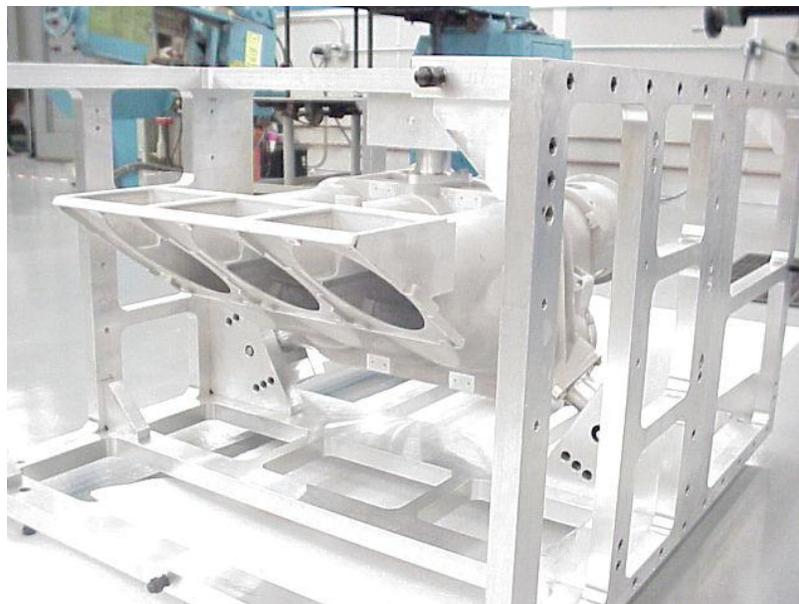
The flight spare optical bench housing mounted in the bench assembly/alignment fixture during a check fit at the Hamilton Sundstrand facility in Long Beach, CA.
